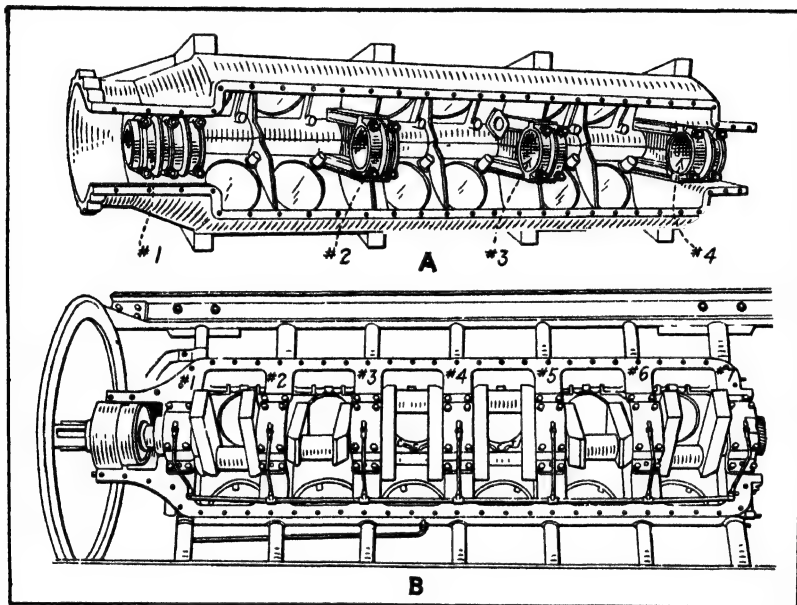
Crankcase and Crankshaft Construction of Early Twelve-Cylinder Motors. A—The Deussenberg Crankcase Had Four Main Bearings. B—The Curtiss Crankshaft Was Supported by Seven Main Bearings.
